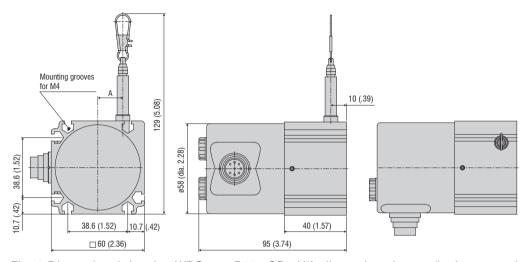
Dimensional drawing WDS- ... - P60 - SR - U/I, dimensions in mm (inches, rounded-off)
